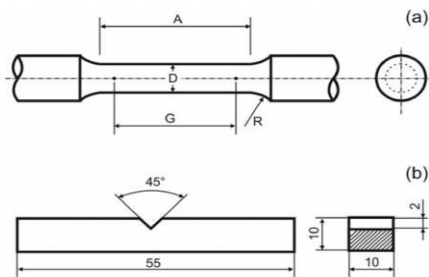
Tensile test specimen dimensions (in mm), d-9, a-54, r-8, g-45. (b) v-notch impact test specimen [as per astm e8m-04 standard]
